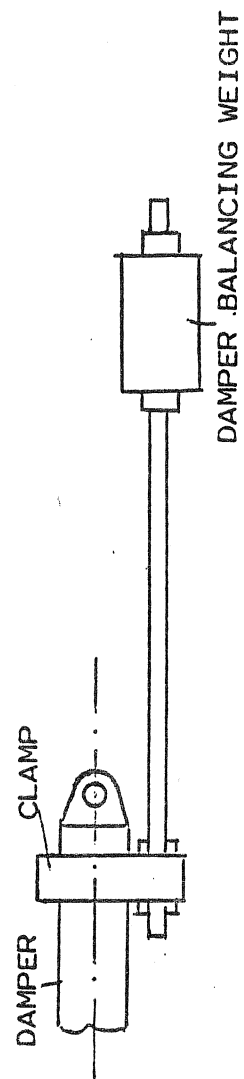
CLAMPED-ON DAMPER BALANCING WEIGHT
